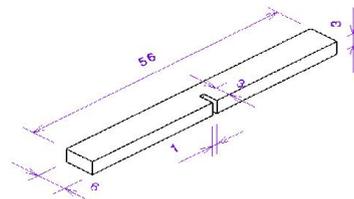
Specimen Dimensions for Fracture Toughness Test
